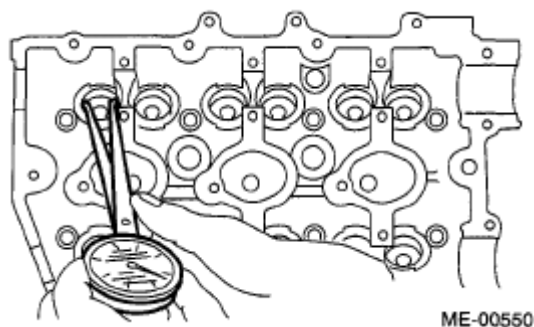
Measuring Inner Diameter Of Valve Lifter Hole Of Cylinder Head
